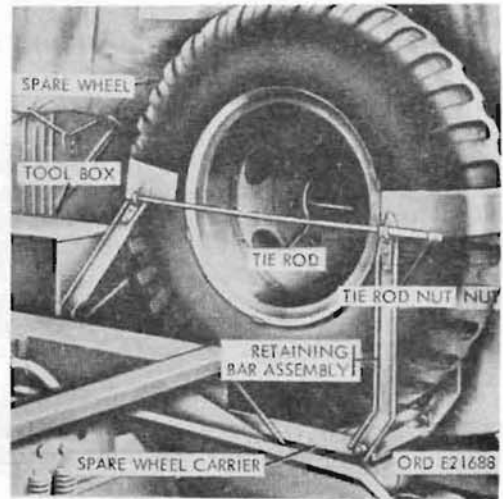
Spare wheel carrier mounted to rear of cab - M47, M59 and M342
